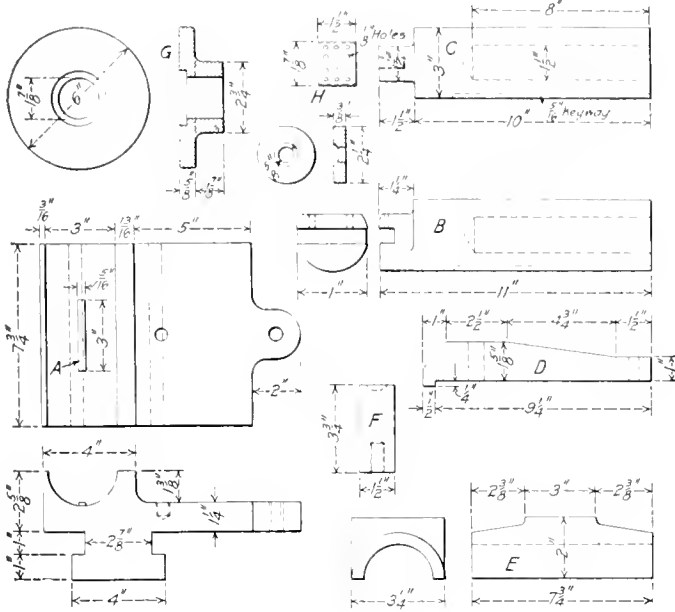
Lathe Attachment for Turning and Rolling Journals.
